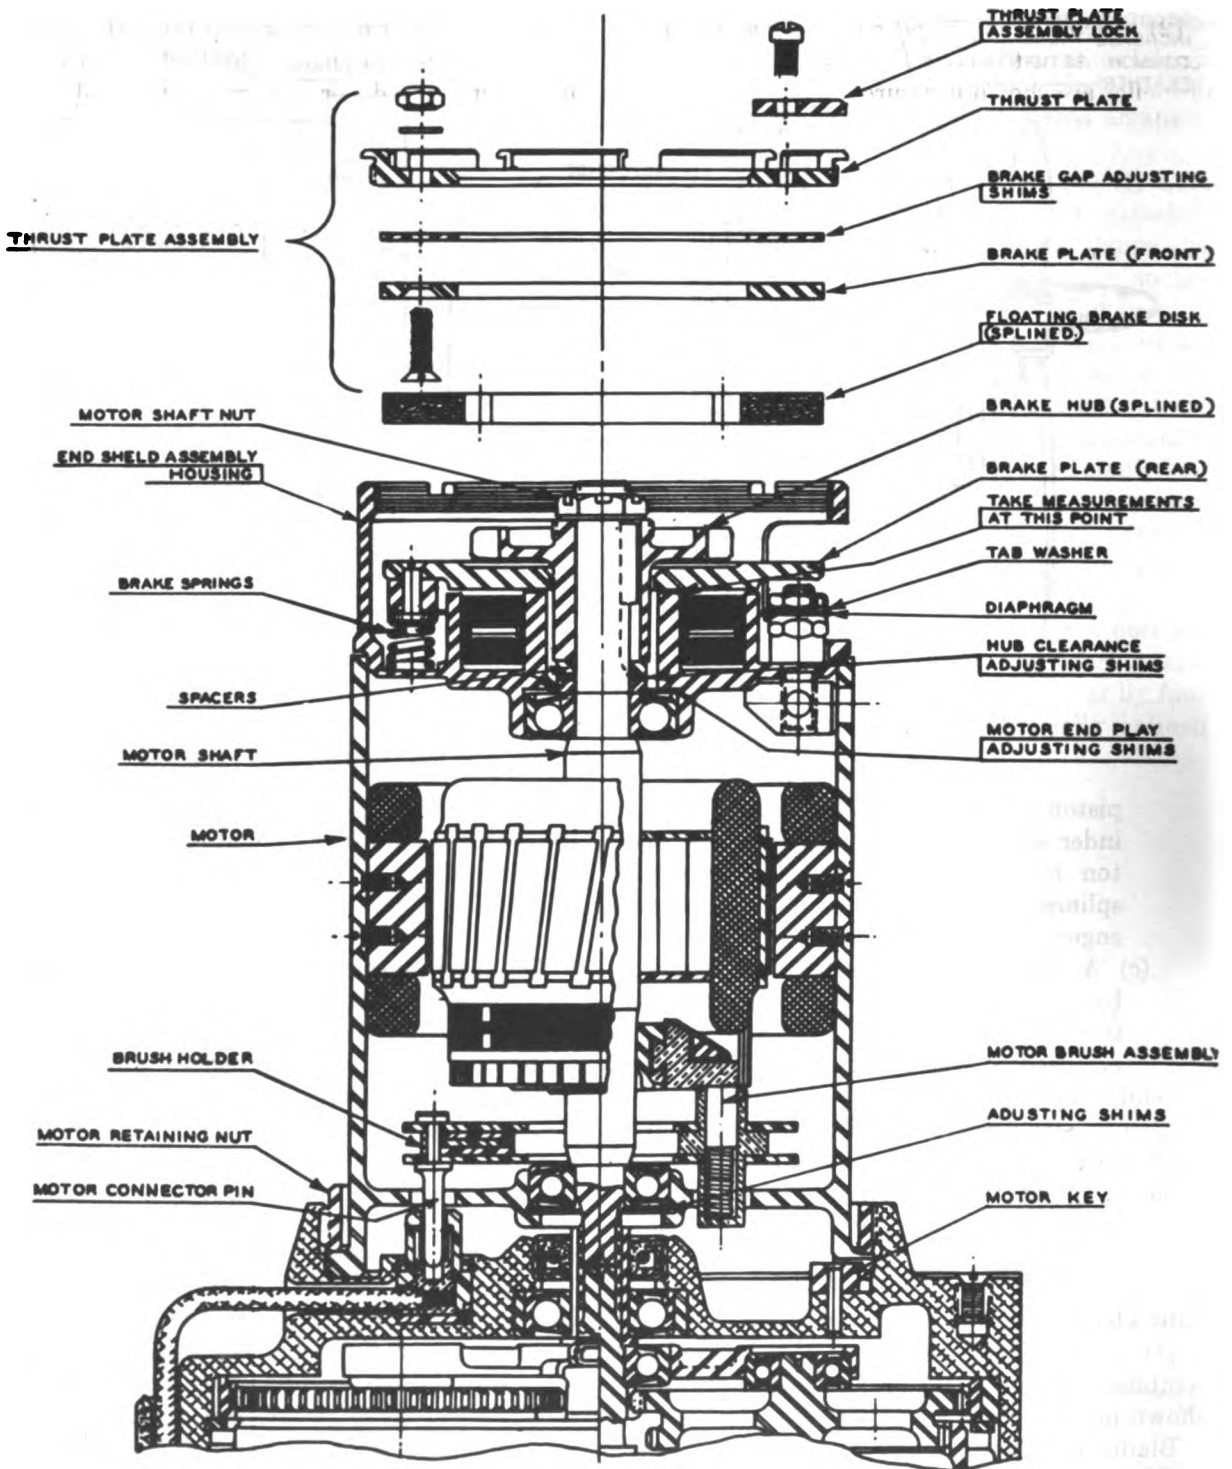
Pitch change motor and brake for an electric propeller.
